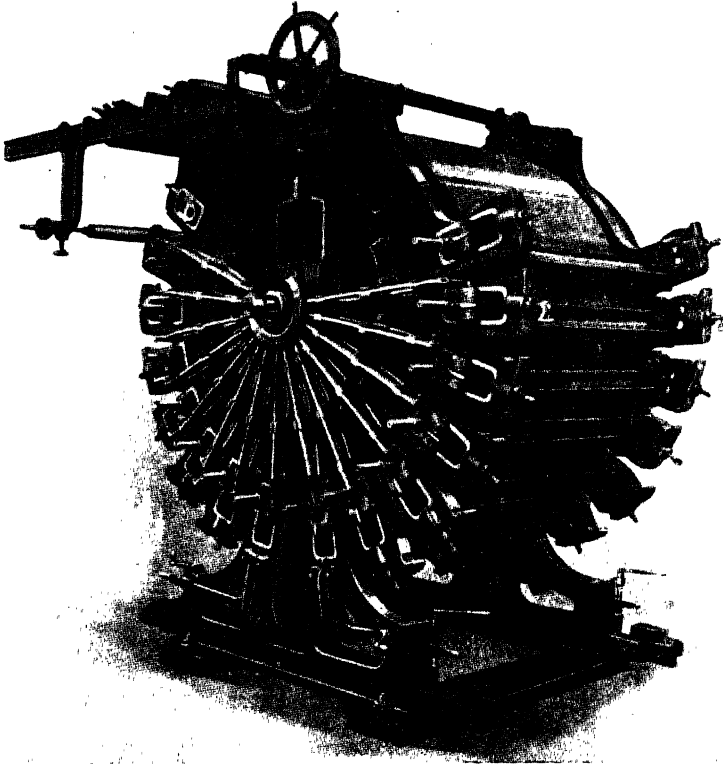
Fourteen-Colour Garment Printing Machine
